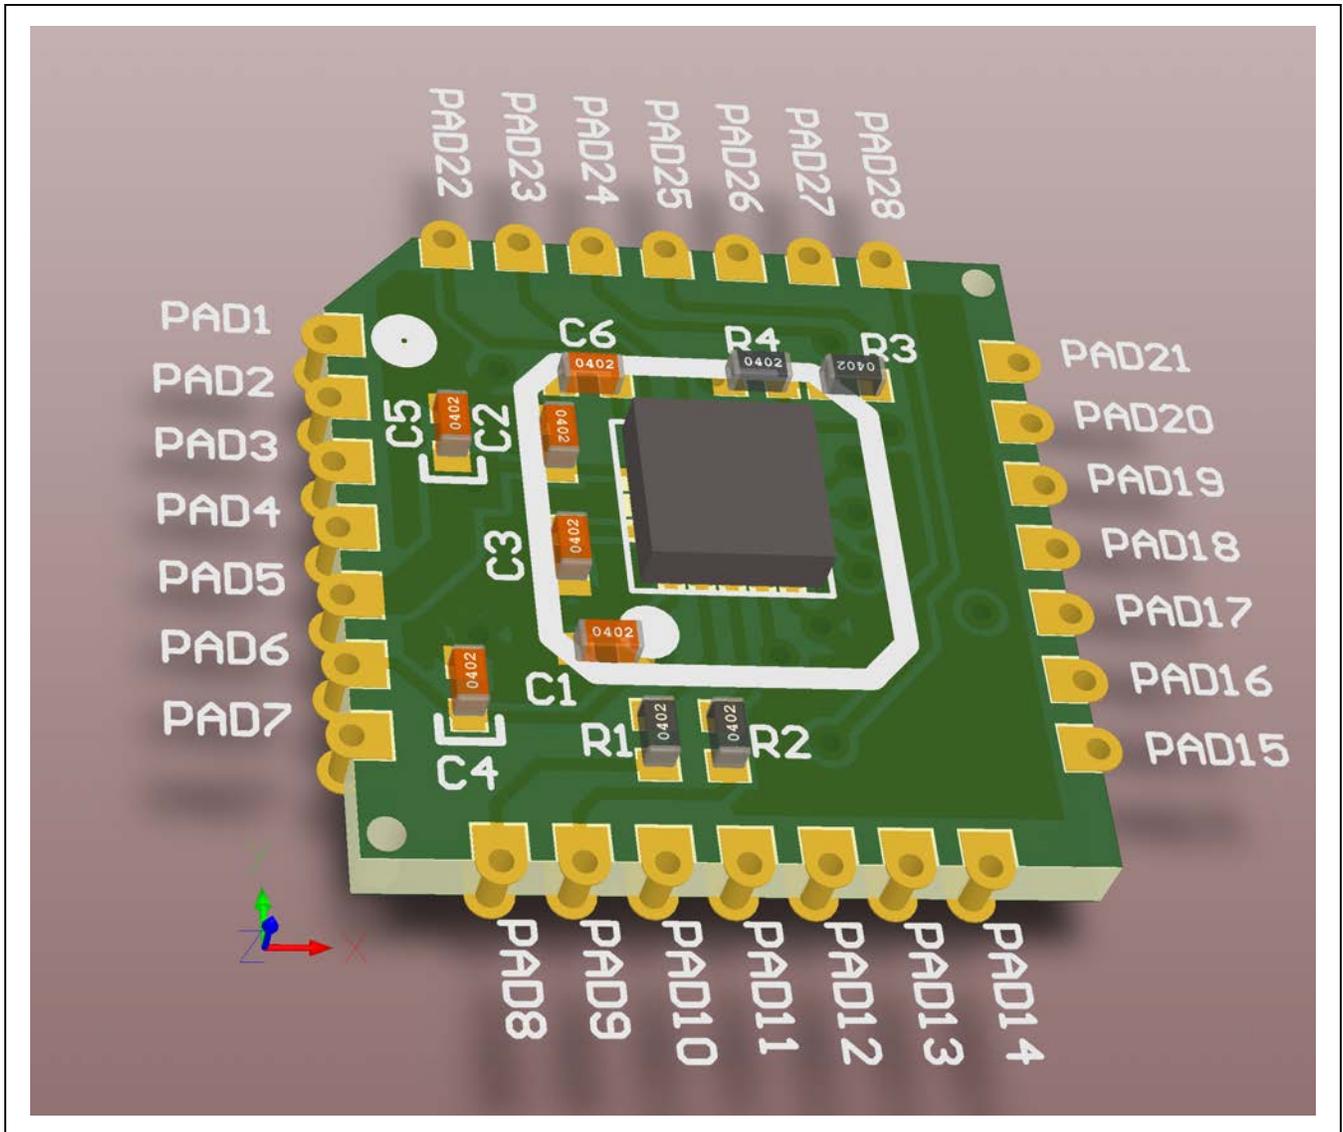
MAX21000 MInD EV Kit STAMP Board Support—3D View
